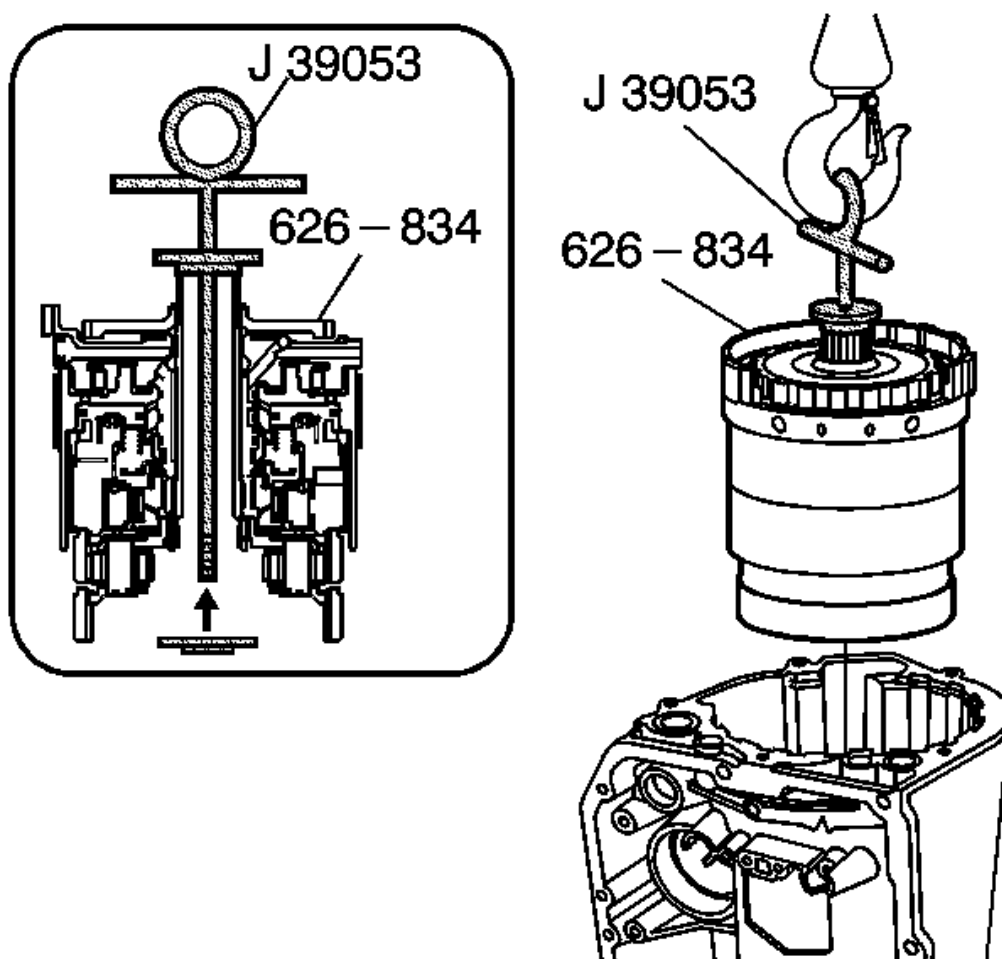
Securing & Lifting Forward And Coast Clutch Assembly
